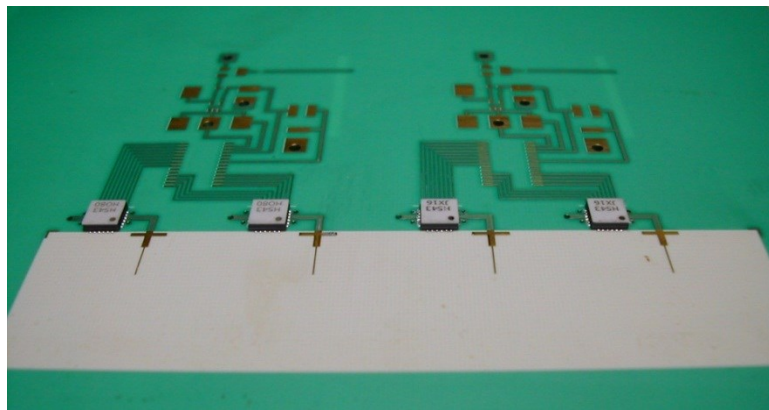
Partially assembled 4x1 WiPAA prototype with phase shifters attached
